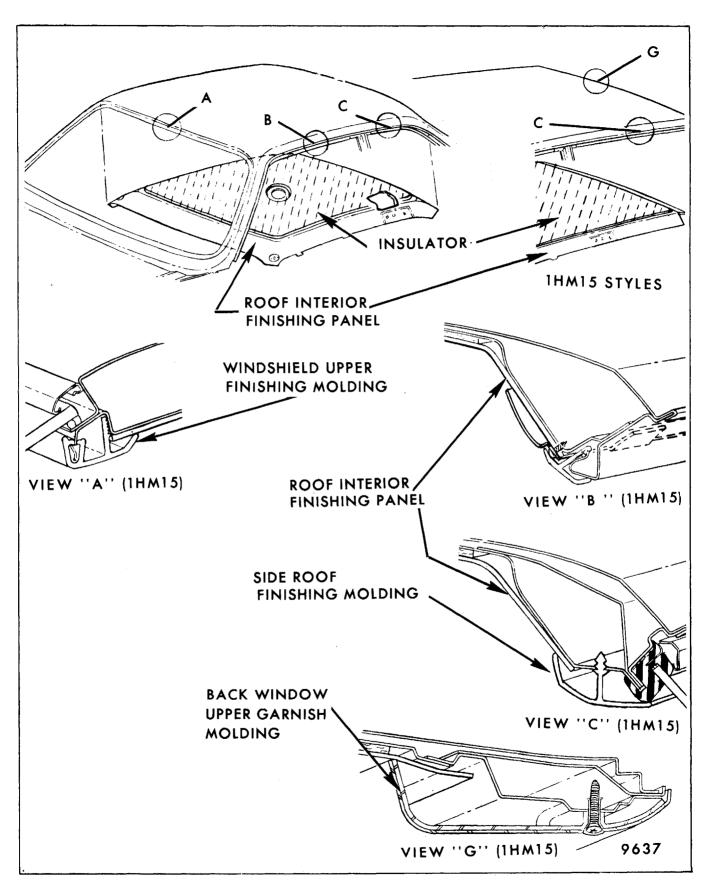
Headlining (Roof Interior Finishing Panel) Assembly - H-15 Styles
